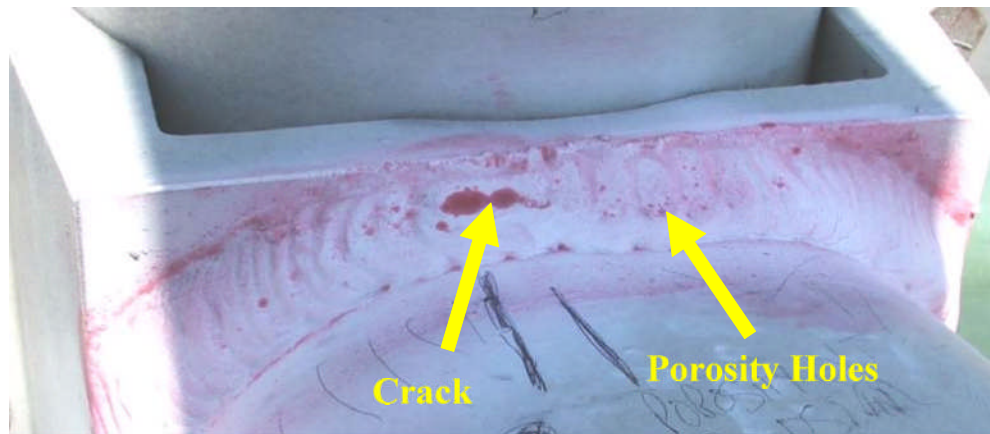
Detection of a Crack Using Dye Penetrant
